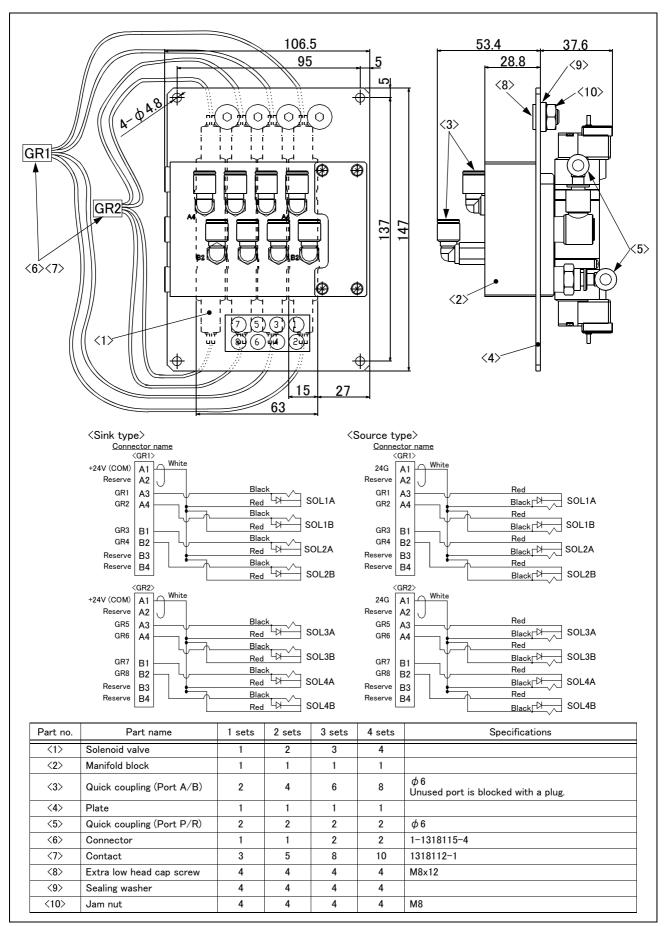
Outline dimensional drawing (1F-VD0*-03/1F-VD0*E-03)
